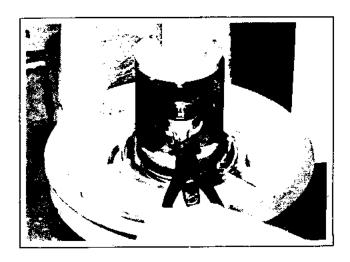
B-49. Removing Transmission Rear Drive Lock Ring with Pliers (UTICA 534-7 or Equivalent)
